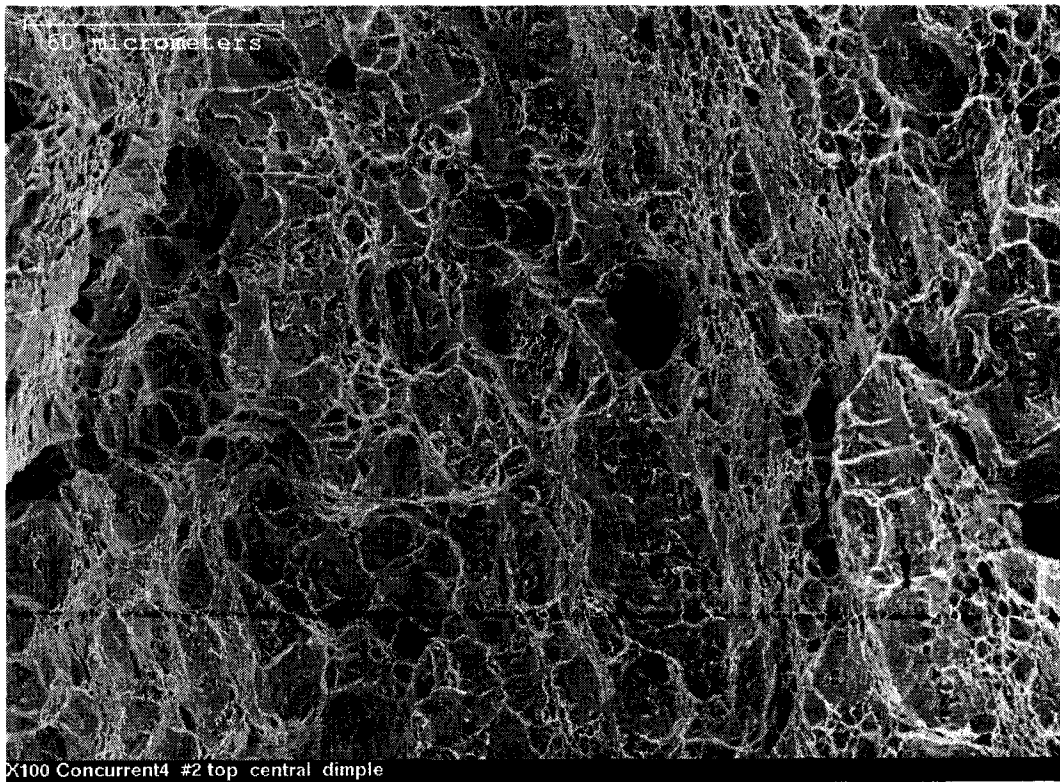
X100 fracture surface of precharged 4th cycle, dimples (high mag)
